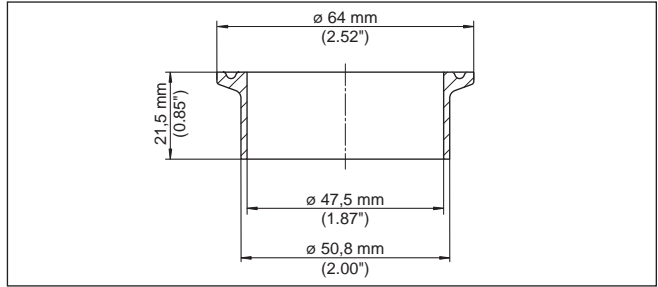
Dimensions of welded socket, Clamp 2" (DIN 32676, ISO 2852) PN 16
